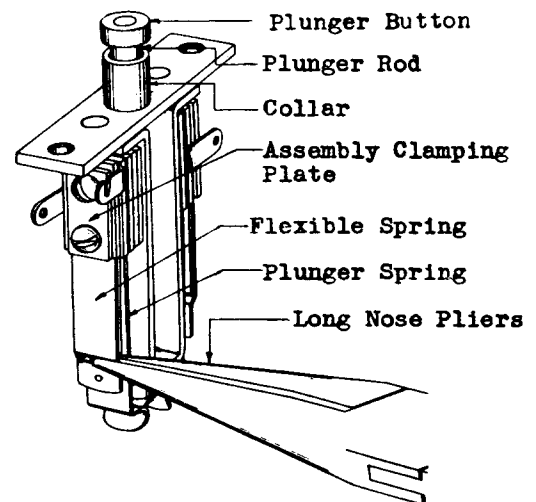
Method of Adjusting Tip of Flexible Spring for Contact Separation
